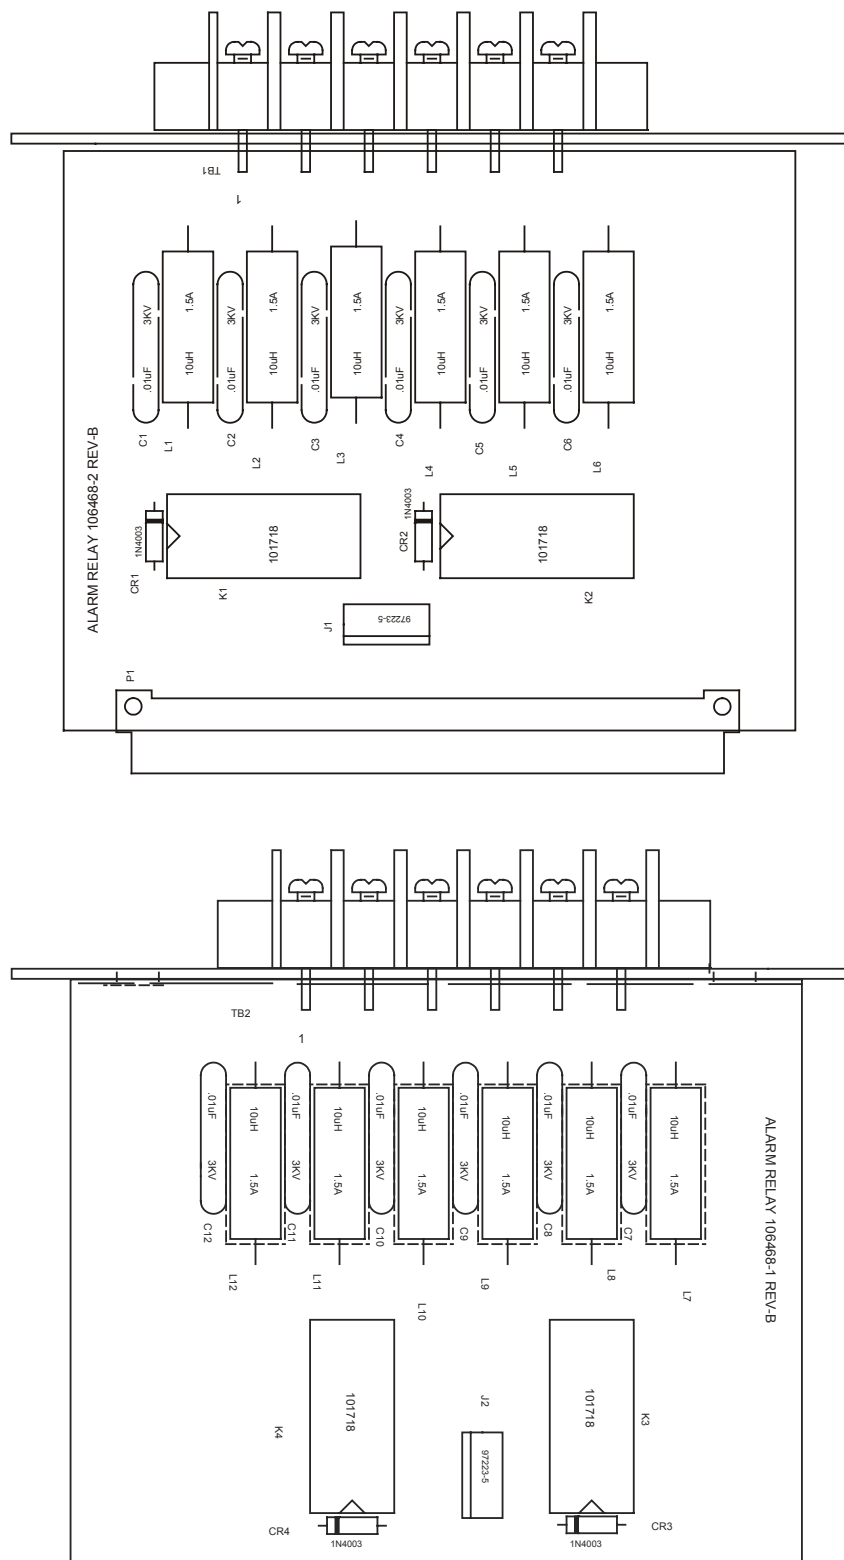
Component locator drawing, Alarm Relay I/O module. (Assembly No. 106465)
